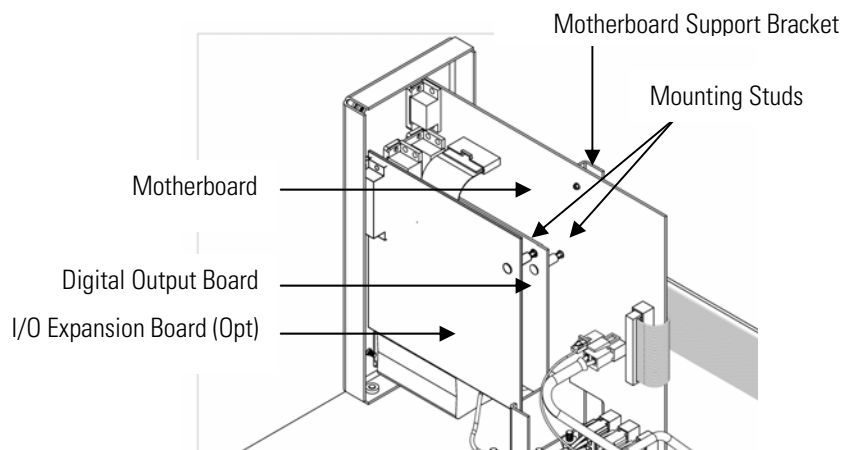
Replacing the I/O Expansion Board (Optional)
